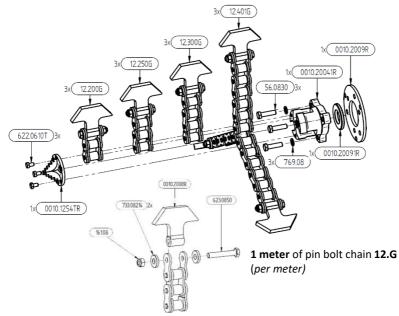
Exploded drawing of the pull part 10.200R & 10.300R
